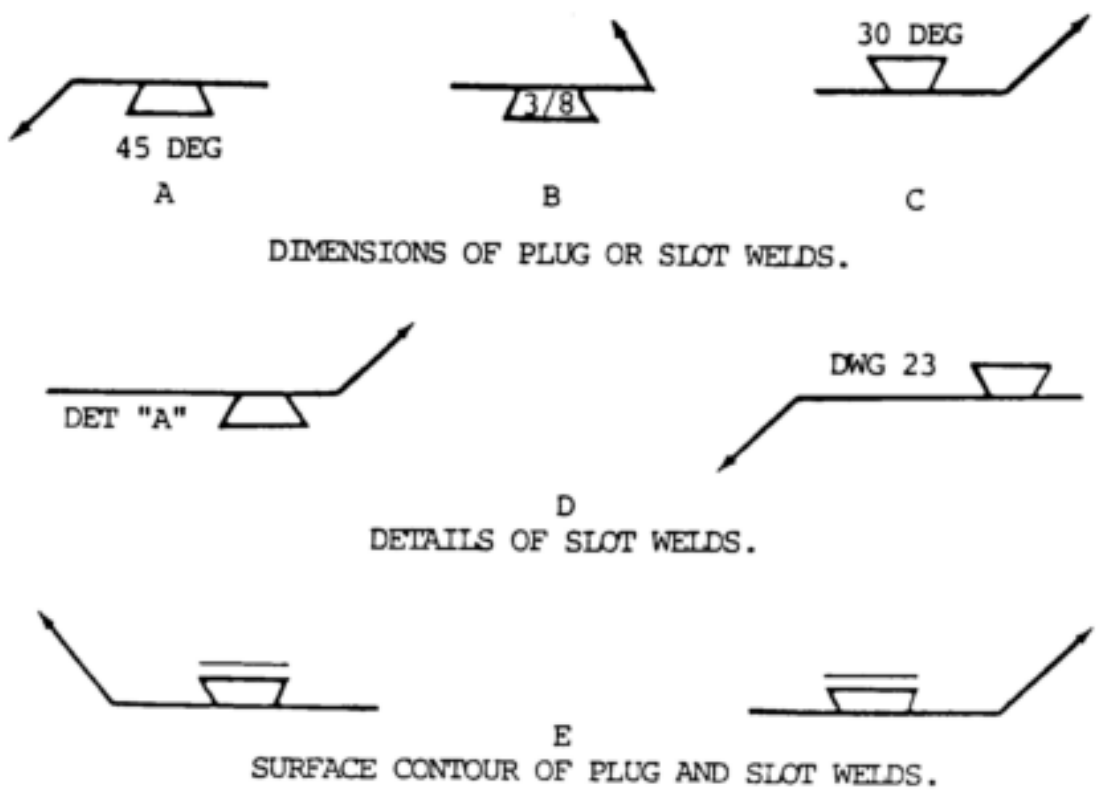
Plug and slot welding symbols indicating location and dimensions of the weld.
